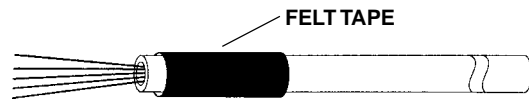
APPLY FELT TAPE TO BUFFER TUBES
